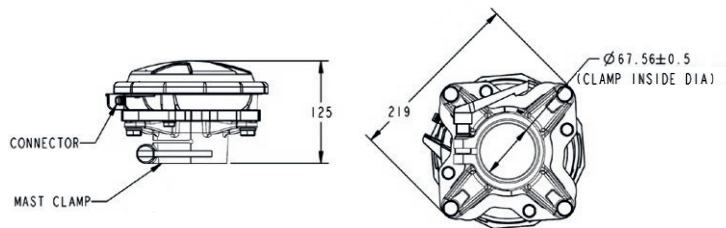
Technical Drawing of Zephyr 3 with 3" mast mounting
